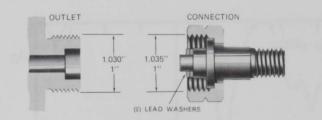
CONNECTION 679 1.030"-14 LH EXT. using Small Flat Seat with Washer
